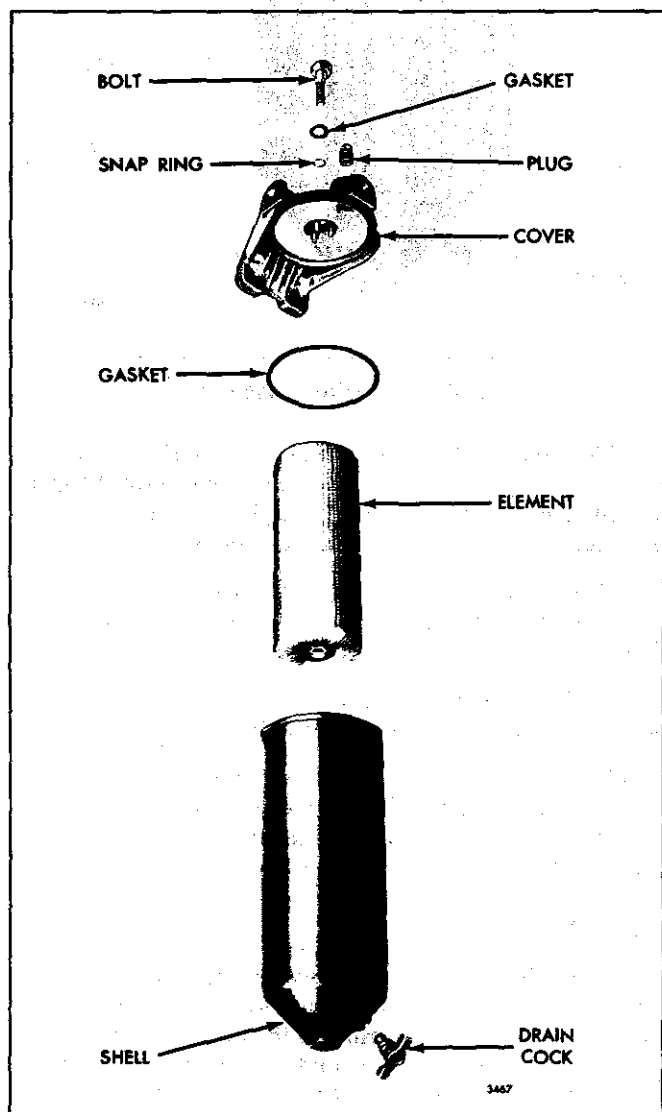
Fuel Strainer Details and Relative Location of Parts
